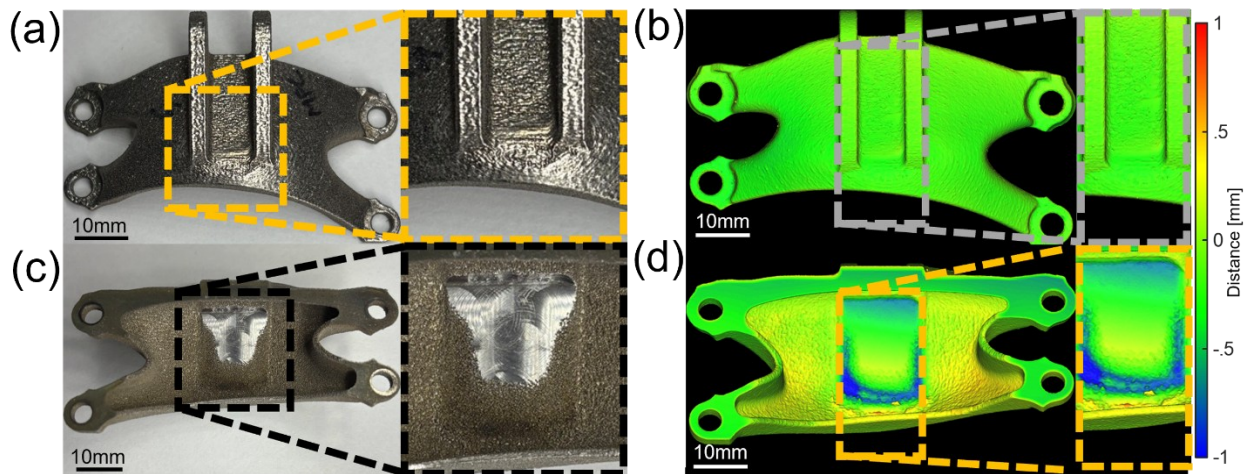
As printed and 3D-scanned partially supported controlled bracket. (a) Top view of as-printed bracket. (b) Top view of 3D-scanned bracket. (c) Bottom-up view of as-printed bracket with as-machined support interface. (d) Bottom-up view of 3D-scanned bracket.
